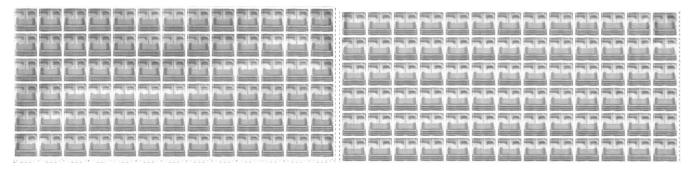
Panels before solder dip (left), Panels after solder dip (right), inspected by SAM
